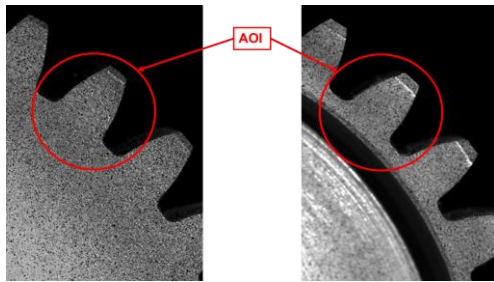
Samples (left, standard gear; right, thin-rim gear) and AOI.
